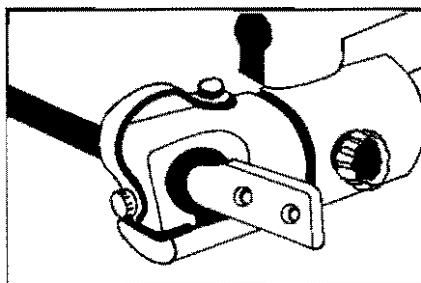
Crimping tool must be fully closed. Failure to close crimping tool will lead to an unsatisfactory and weak joint.
